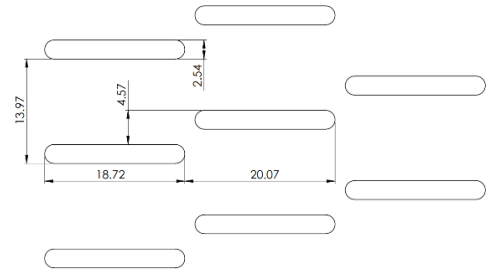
BASELINE HEAT EXCHANGER TUBE SCHEMATIC (IN MILLIMETERS) [15].
